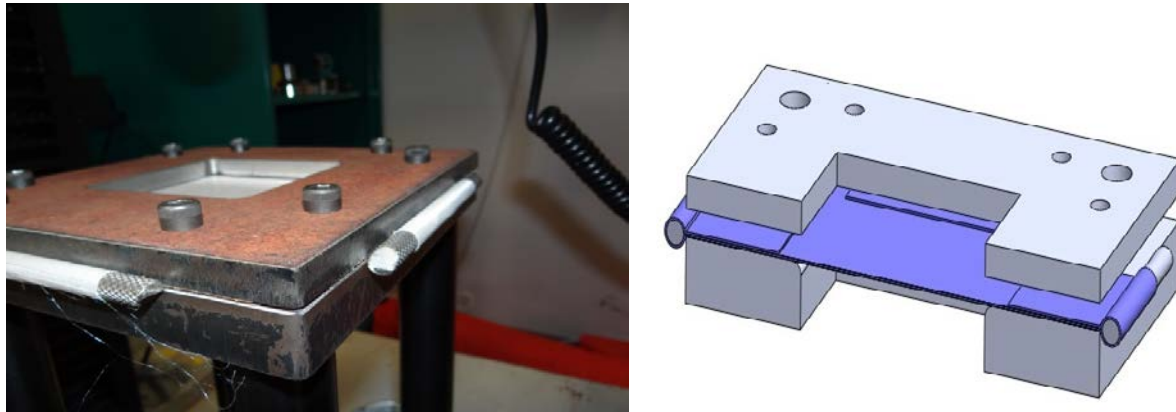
Photograph: relocated knurled rods at outer plate edge with new cruciform geometry and wrapping of coupon. CAD cross-section: top plate raised to show coupon tabs.
